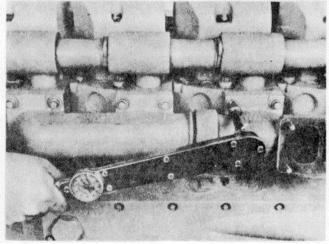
N-96. Tighten the Exhaust Manifold Capscrews TURBOCHARGER AND AIR CROSSOVER
